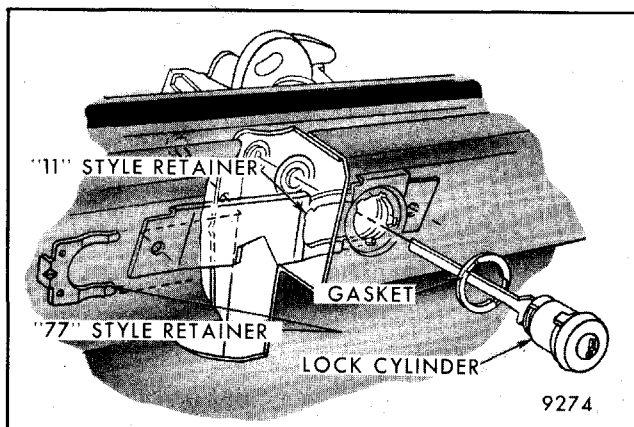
Typical Side Loading Lock Cylinder Retainer - "H-11-77" Shown
